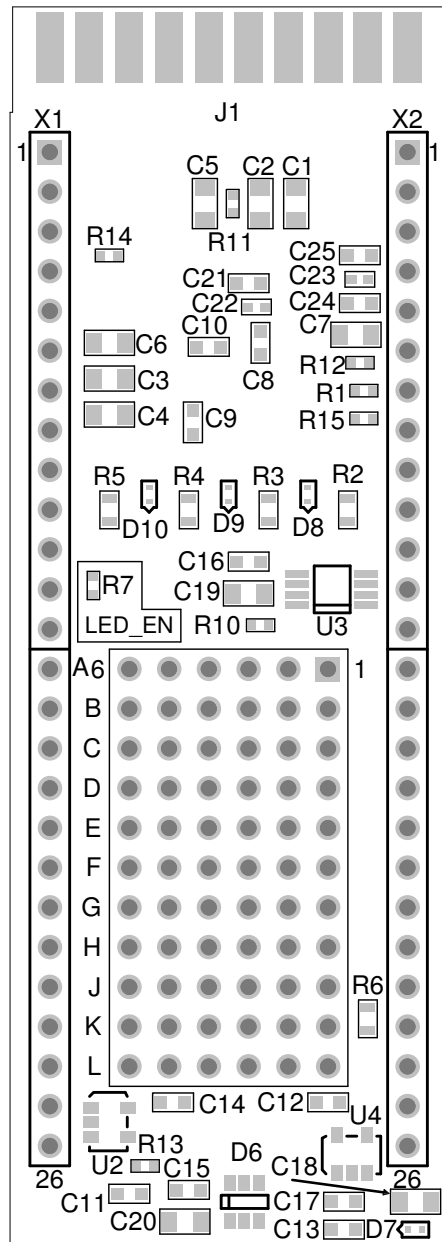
Bottom Component Placement Drawing (View from Bottom)
